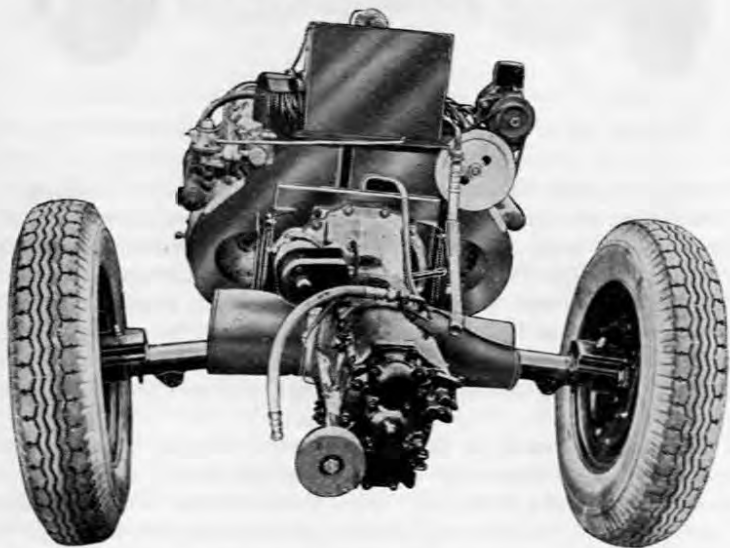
Driving unit of the T 87 car. Overhung engine on the flywheel flange.
